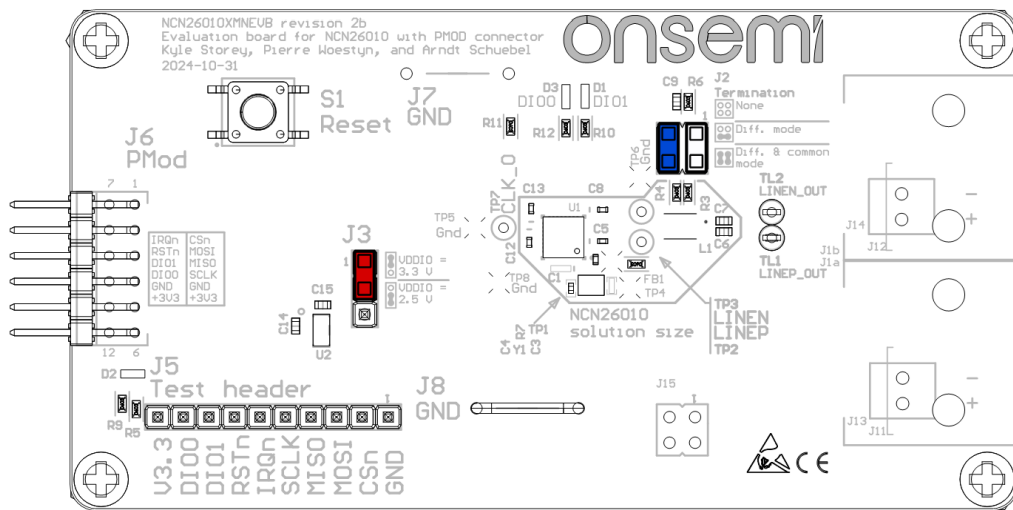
Placement of Jumpers after Manufacturing (Revision-2 Board Shown)
